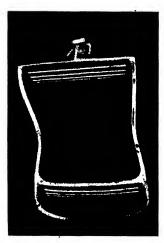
Aluminium Alloy (NA.226) Die-Casting after Test
